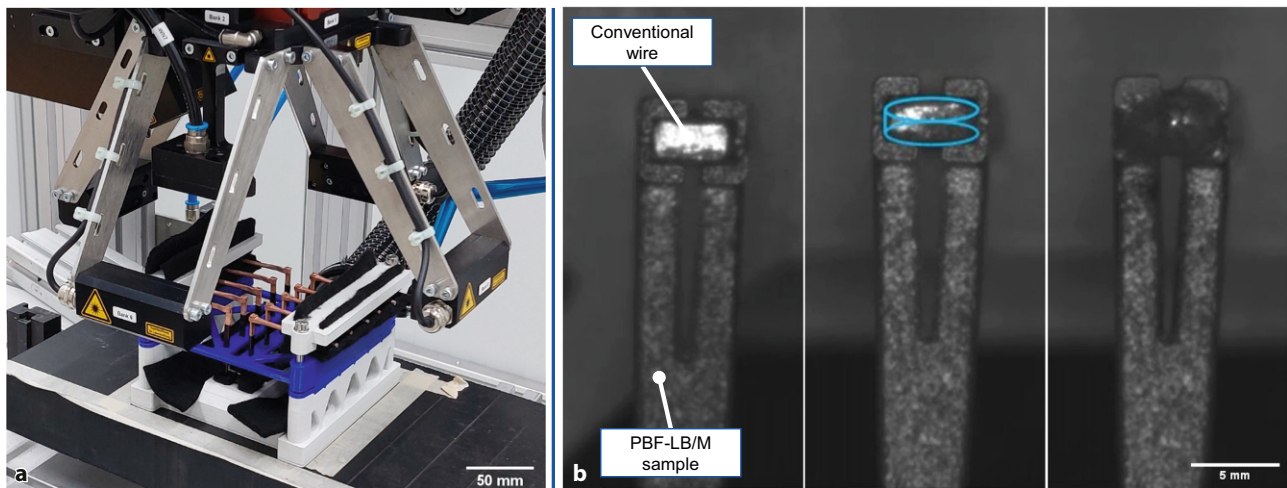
Welding fixture with mounted samples (a) | Welding process steps of a single sample (b)
